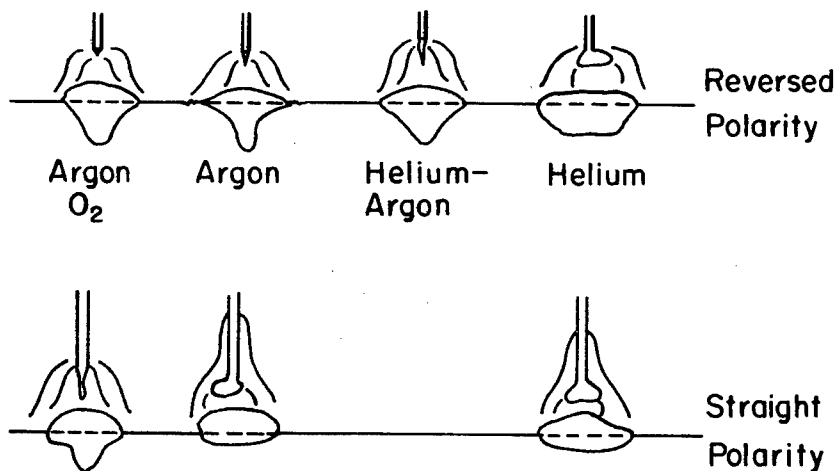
BEAD CONTOUR AND PENETRATION PATTERNS FOR VARIOUS SHIELDING GASES WHEN GAS-METAL-ARC WELDING
